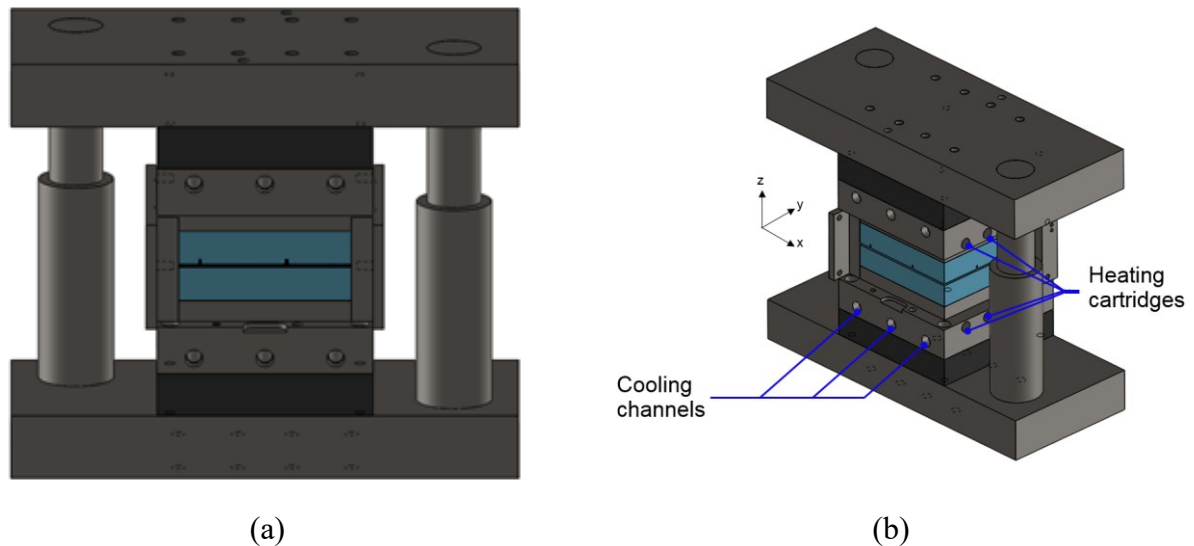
Rib moulding setup showing (a) front view and (b) isometric view.
